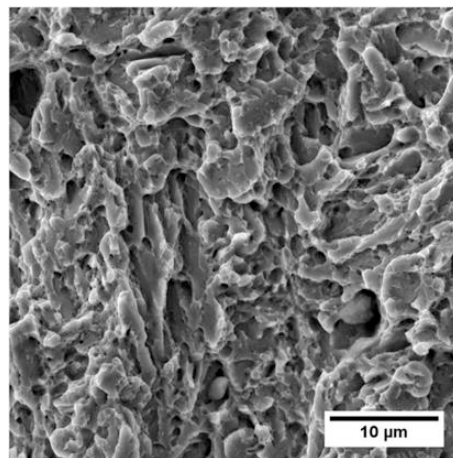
Representative microscale fracture morphology of both CHT and HPHT samples.
